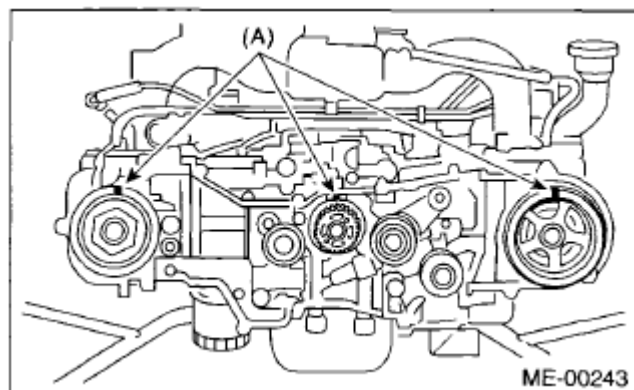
Identifying Alignment Marks On Cam Sprocket
